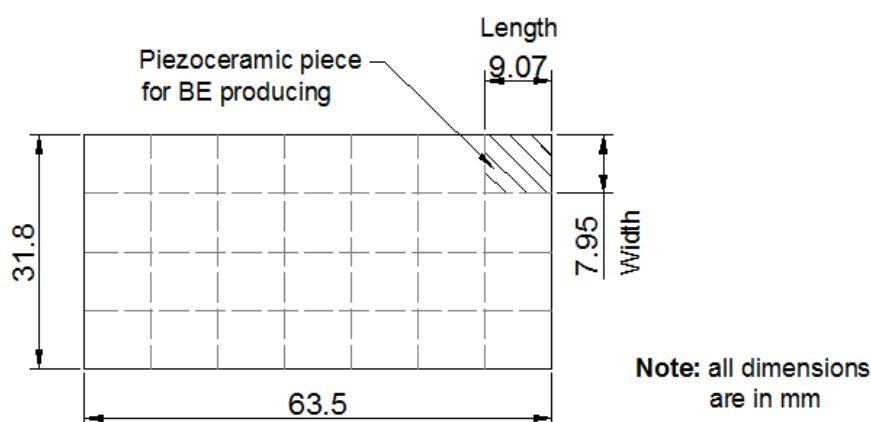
Piezoceramic plate cut into 28 BE-sized pieces
